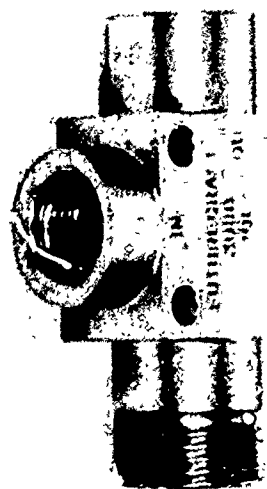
Exploded View - Valve and Squib After Temperature and Firing Tests
